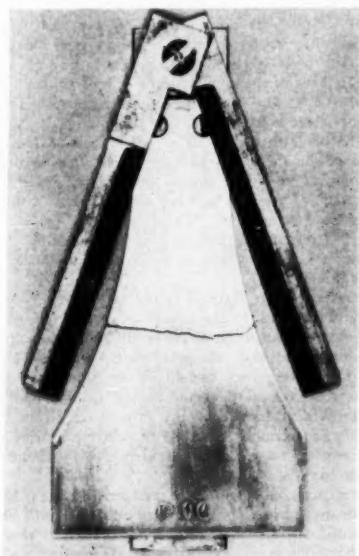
FATIGUE-TEST SPECIMEN OF ALUMINUM ALLOY IN SPECIAL MEASURING JIG
